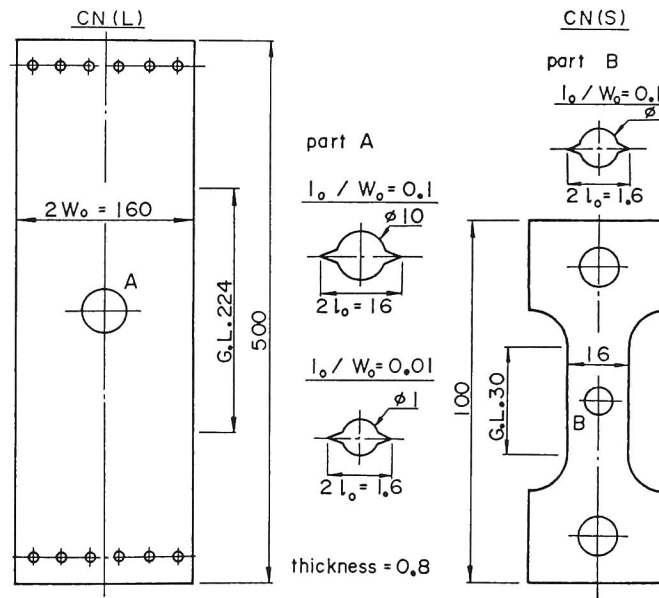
Shape and size of specimens tested in section 3.2.
